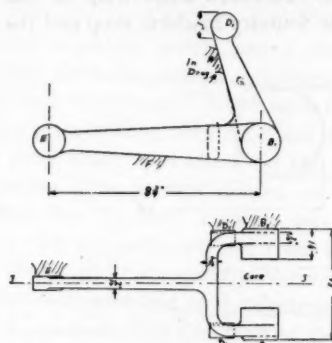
WEIGHT OF CASTING 11 POUNDS
